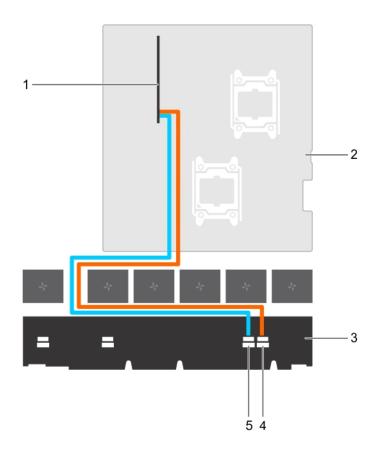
Cabling between the hard drive backplane and RAID controller card without any riser modules
